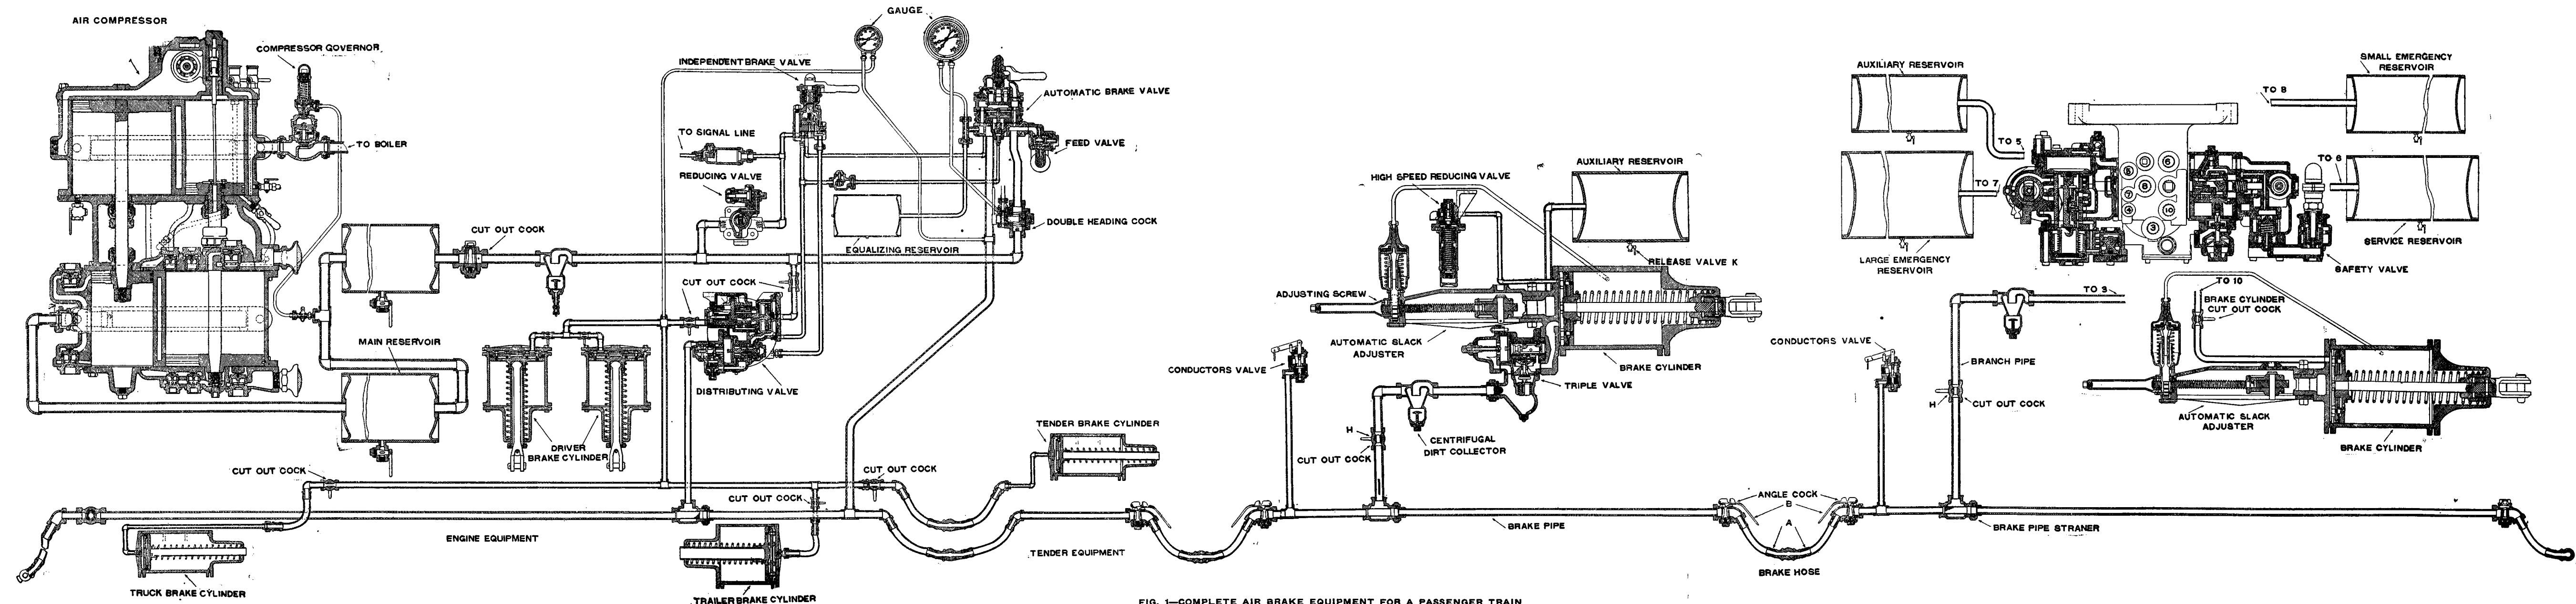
COMPLETE AIR BRAKE EQUIPMENT FOR A PASSENGER TRAIN
